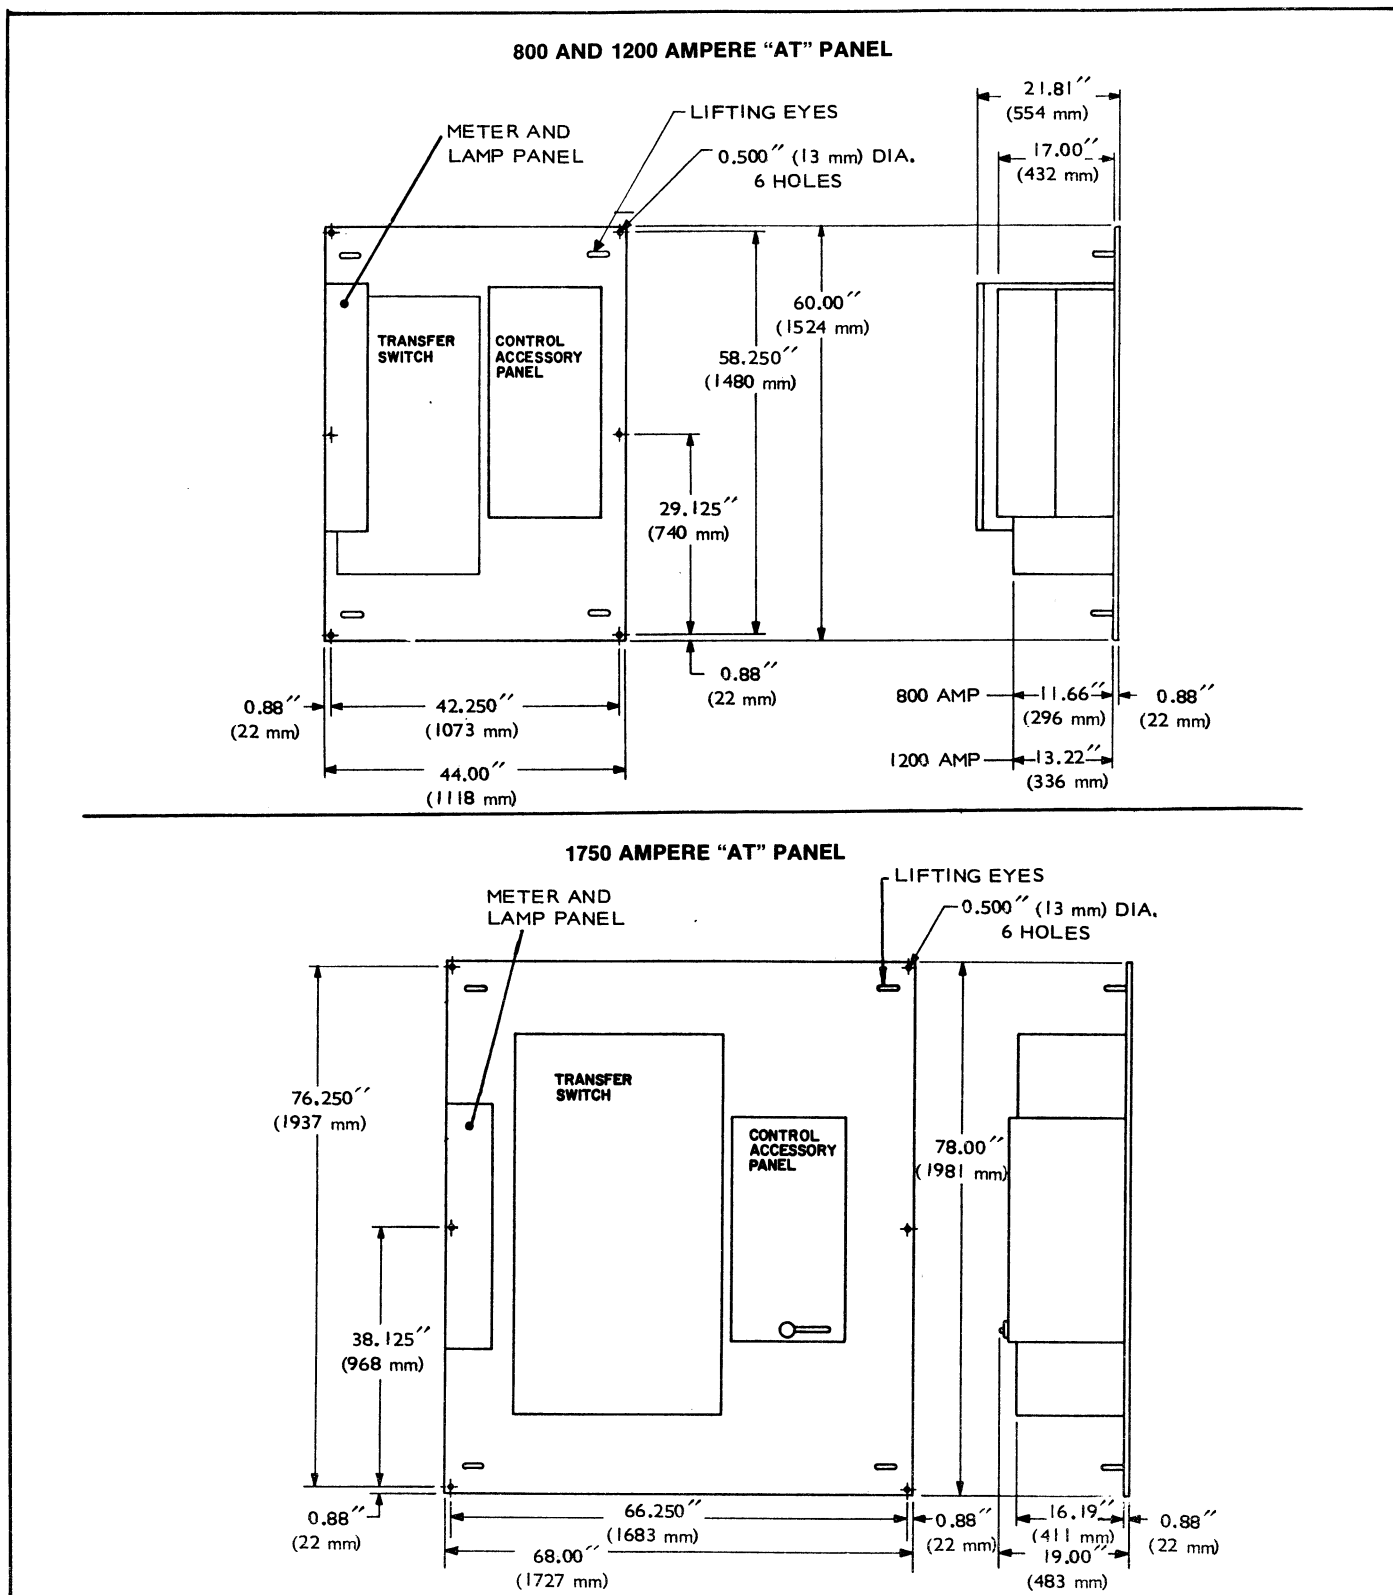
DIMENSIONS OF OPEN-CONSTRUCTION "AT"
